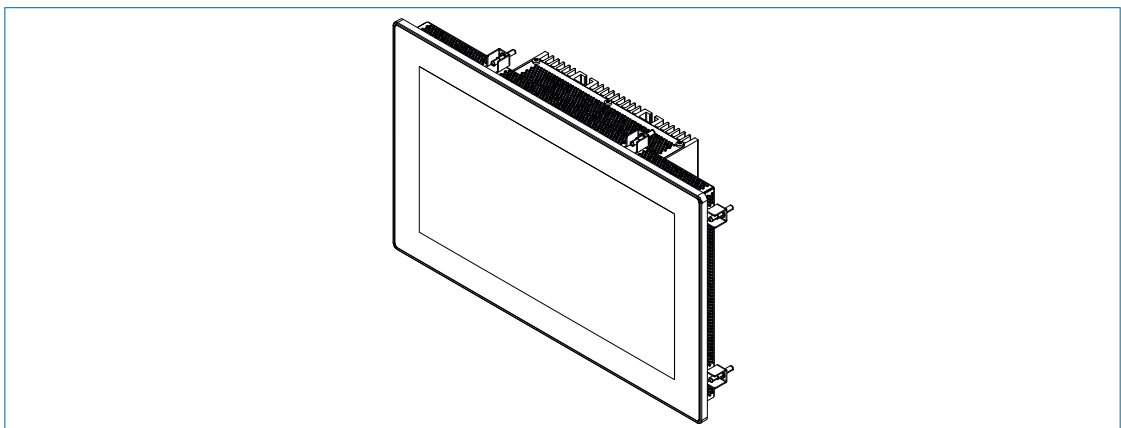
13.3" Prime Panel Pico Installation - view of device
